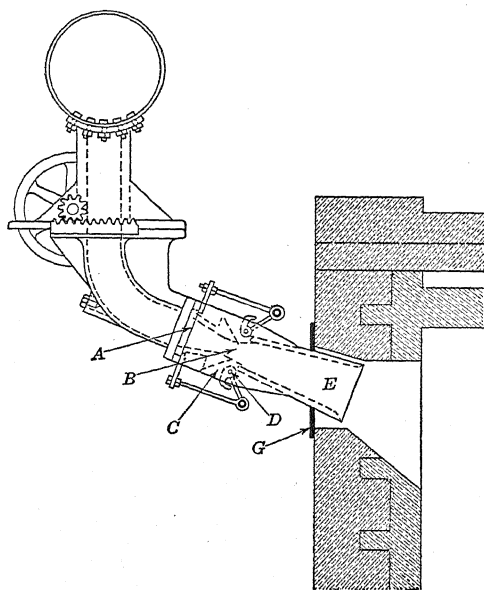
CUT THROUGH BRADSHAW BOILER BURNER.
